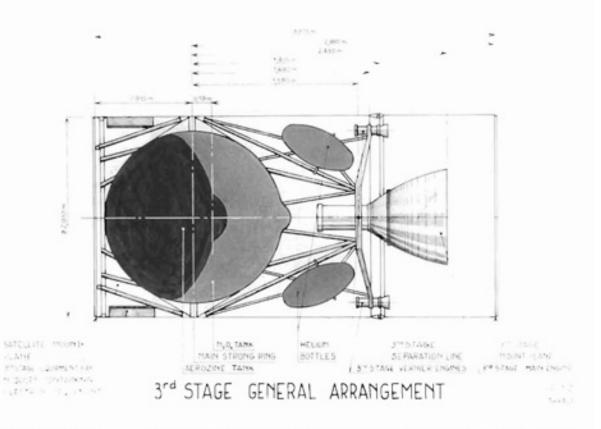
Schematic diagram of Astris. (Archives of the Deutsches Museum) reach his goal, the engineers had to combine two highly-sophisticated manufacturing modes: the techniques of explosive forming and of electronic-beam welding in a vacuum (Figure 2). Explosive forming as a novel production technique had been developed in the United States to solve the problem of fabricating the gigantic boosters of the Saturn rockets for the Apollo programme.¹³ In a final step, the wall thickness was reduced by chemical milling.
